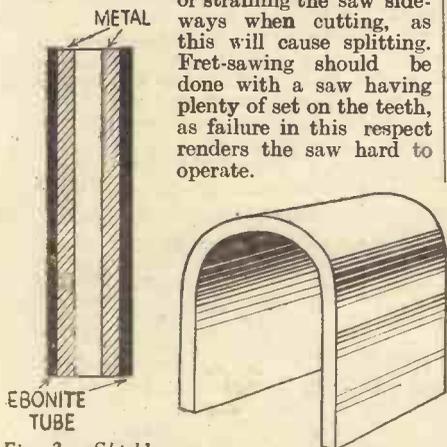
Shielding a cylindrical metal part with ebonite. Fig. 4.—Sheet ebonite can be bent to this shape by heating.
